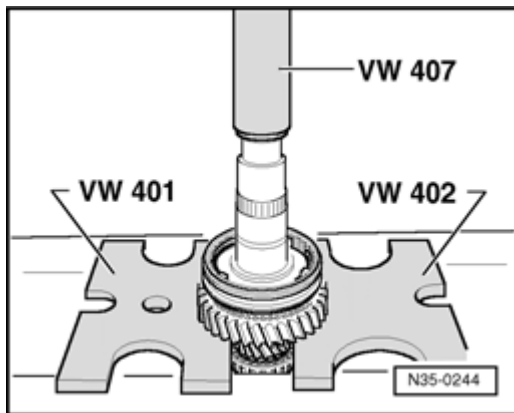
Pressing off 1st and 2nd gear locking collar and synchro-hub
